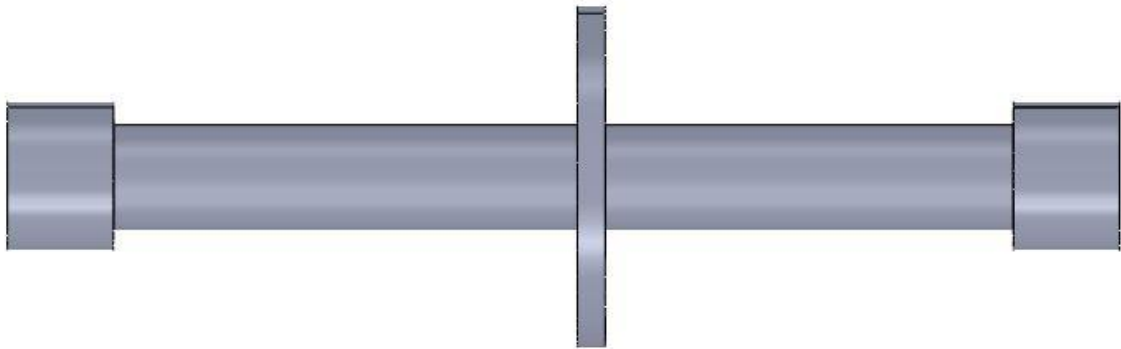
shows the rotor with shaft and disc drawn in the Solidworks .
